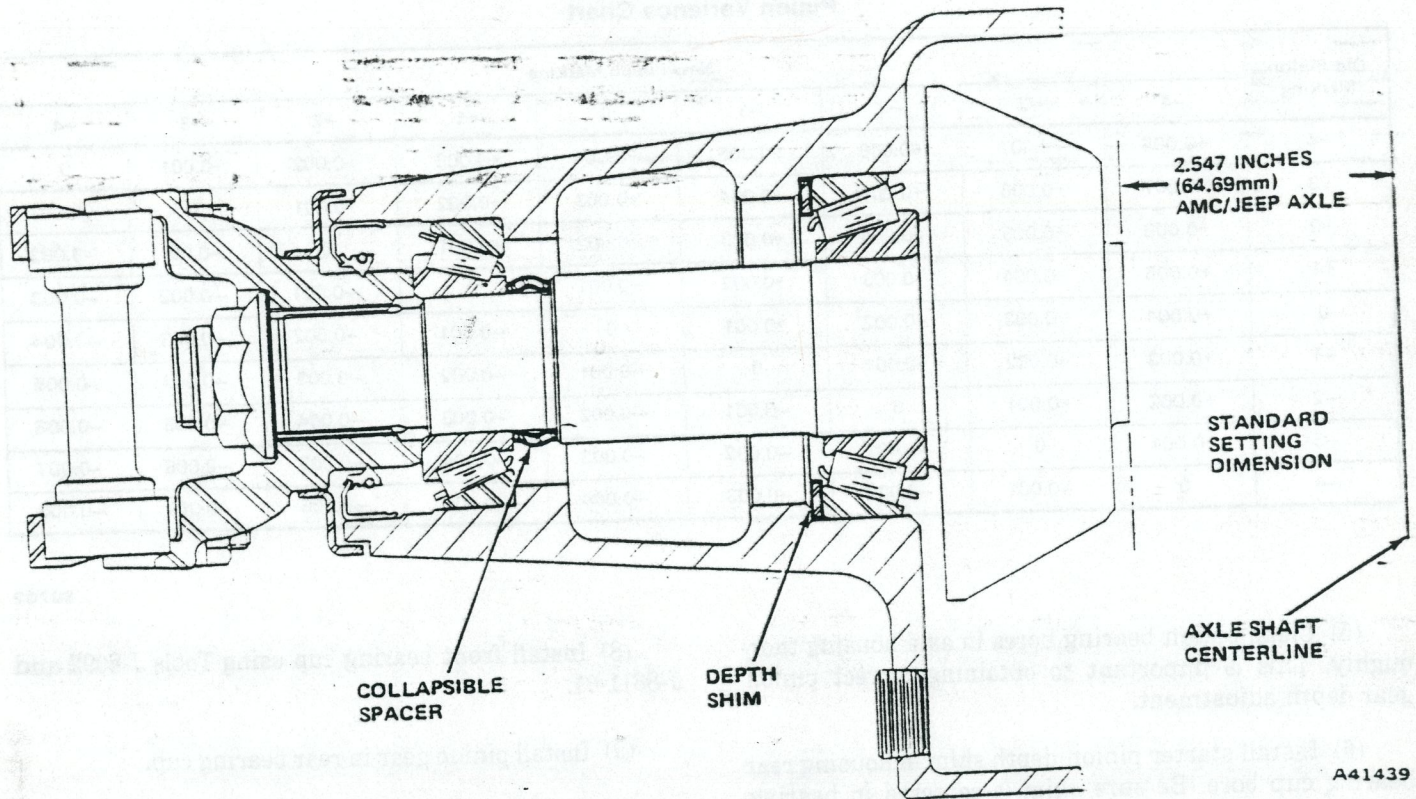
F-35 Standard Setting Dimension and Pinion Depth Shim Location—AMC/Jeep Axle
